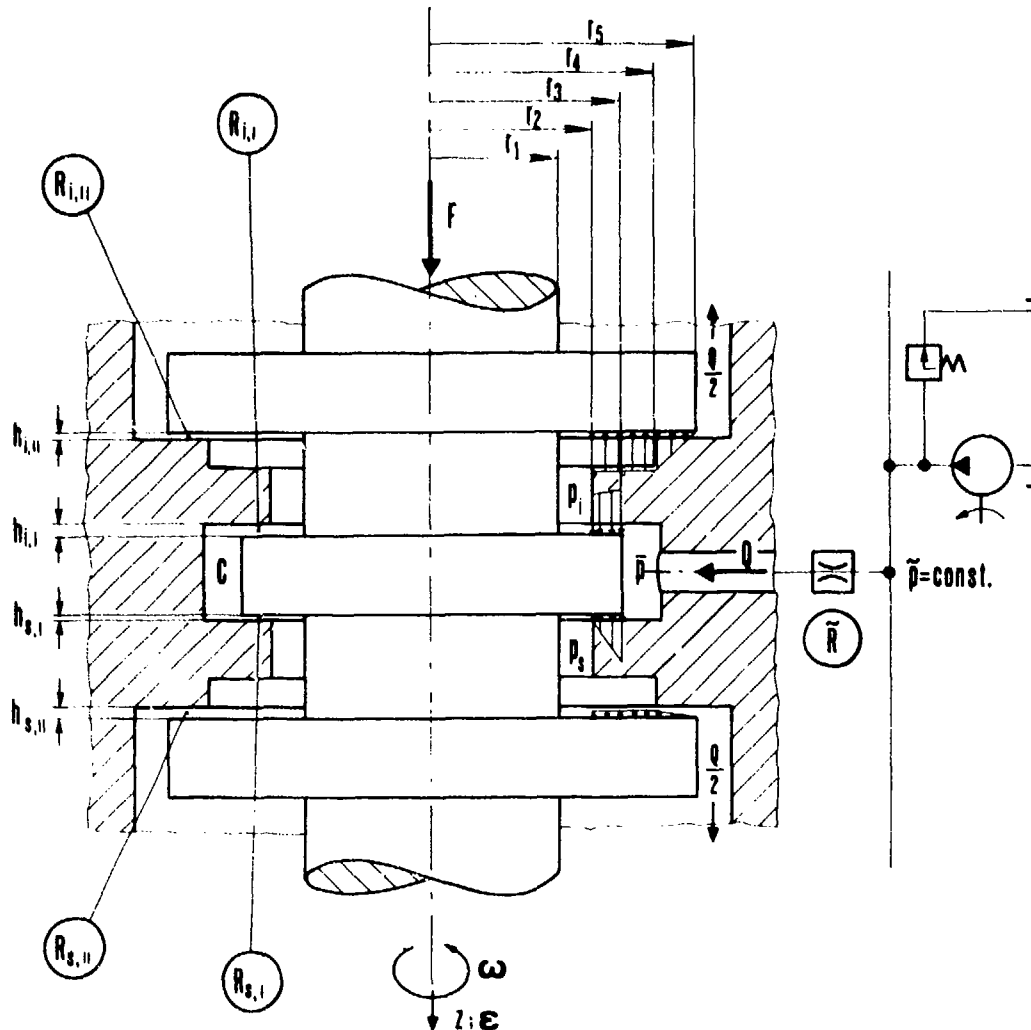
The self-regulated hydrostatic opposed-pad thrust bearing.
